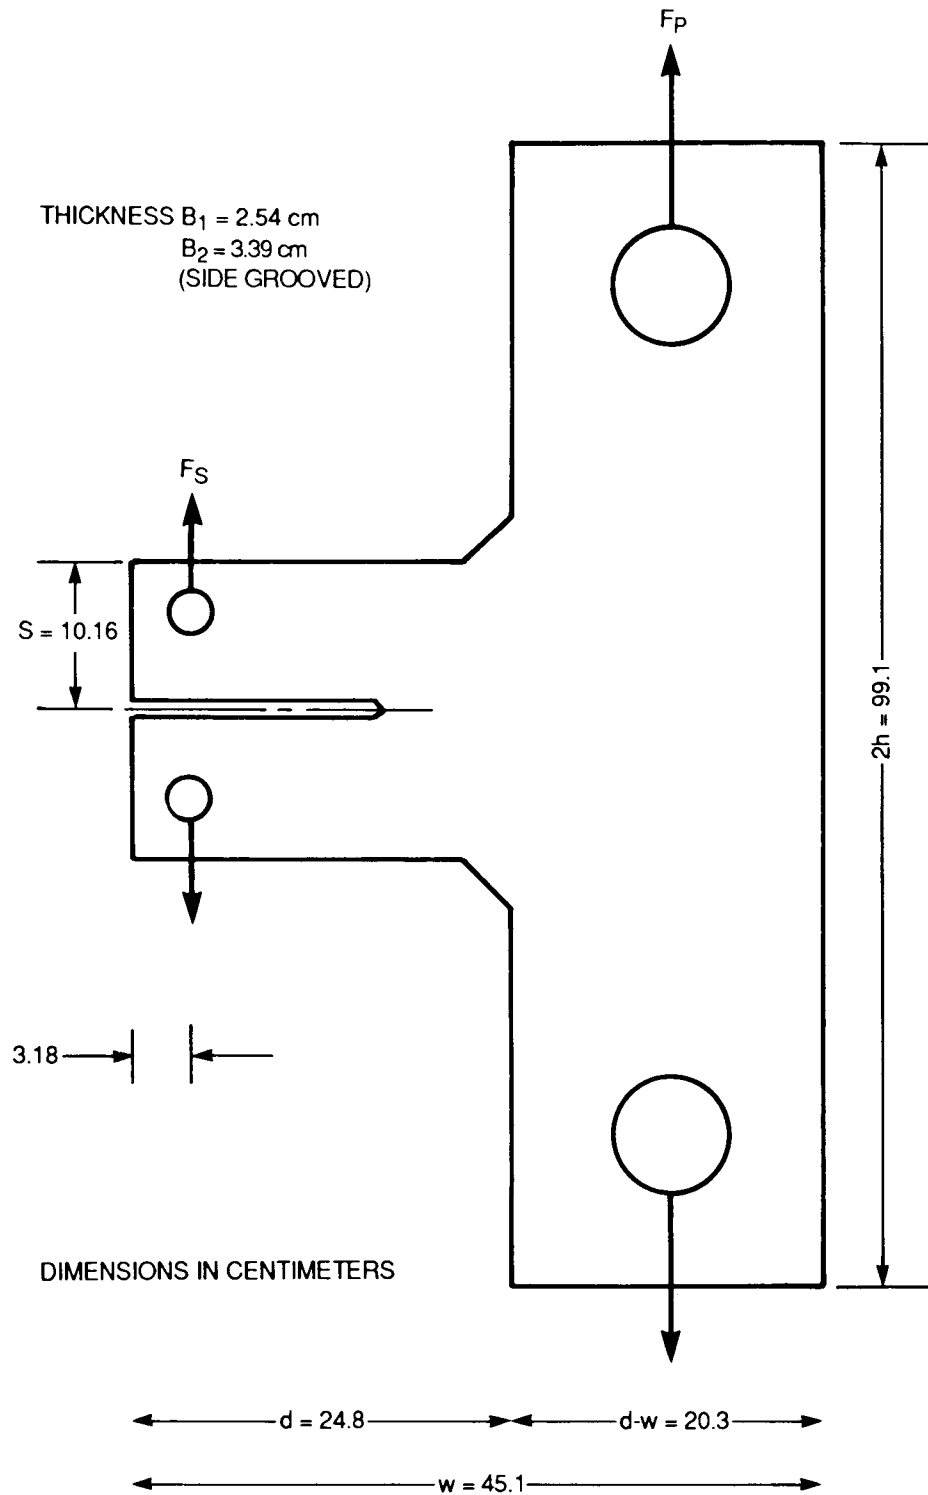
Schematic of stub-panel, crack-arrest test specimen.
